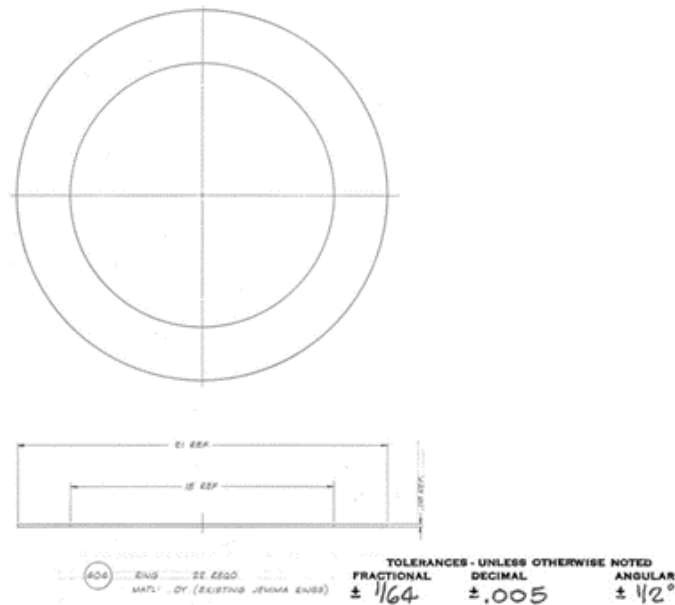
Engineering Drawing (19Y-29621-30A) of the HEU Outer Ring: HEU 21/15 (Dimensions in Inches).
